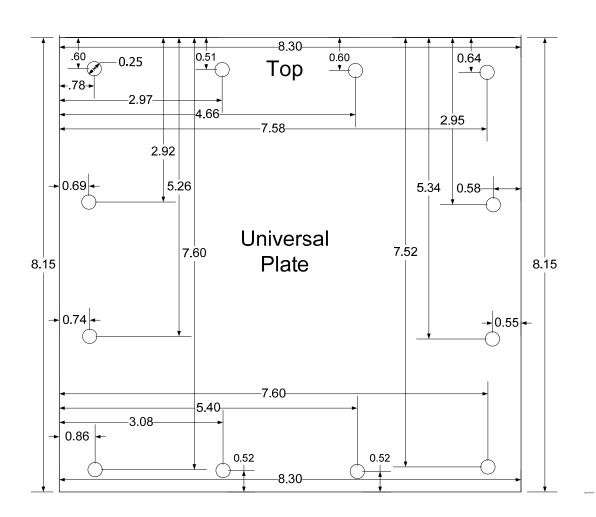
Room 24S Customer Mounting Plate Dimensions On Plate #1
